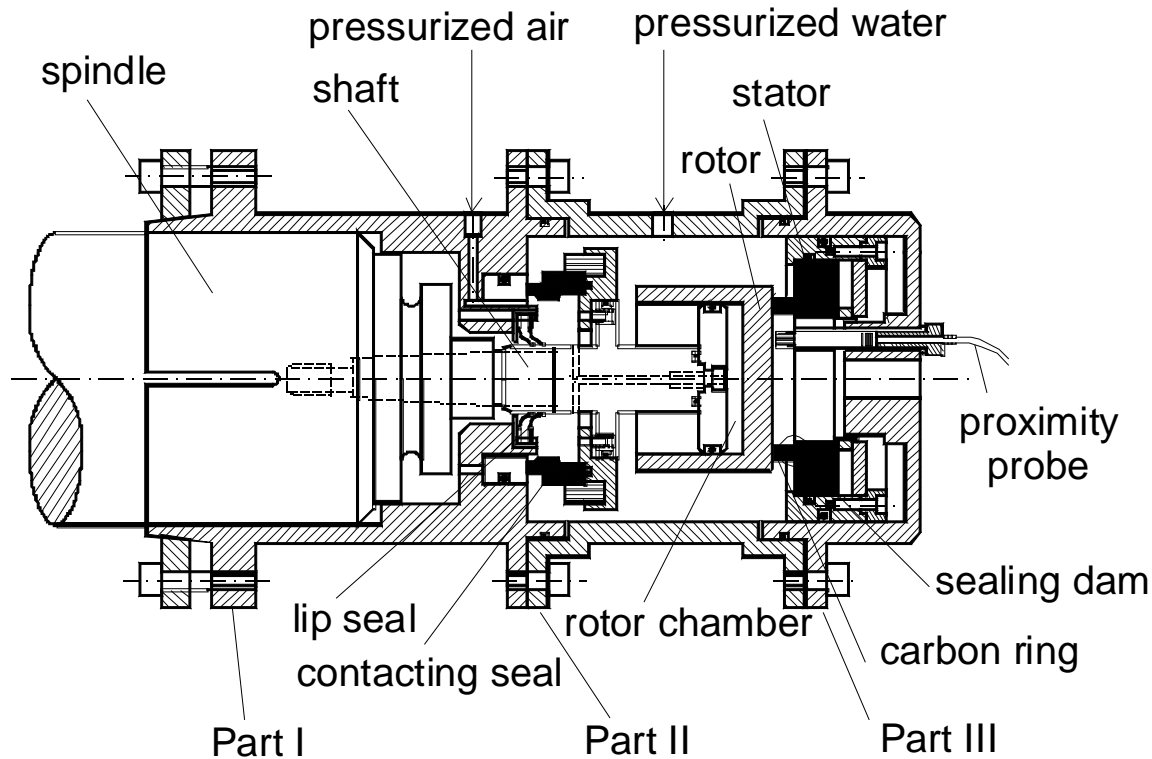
Schematic of the FMR noncontacting mechanical seal assembly
